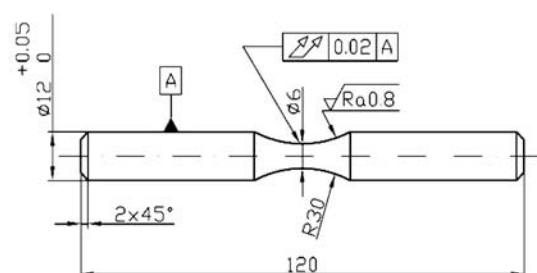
Shape and dimensions of smooth specimens for fatigue tests
